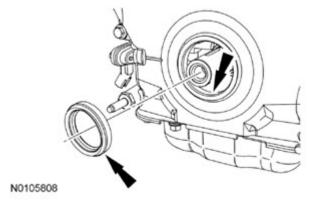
Removing Crankshaft Front Seal Using Crankshaft Front Oil Seal Remover Courtesy of FORD MOTOR CO.
